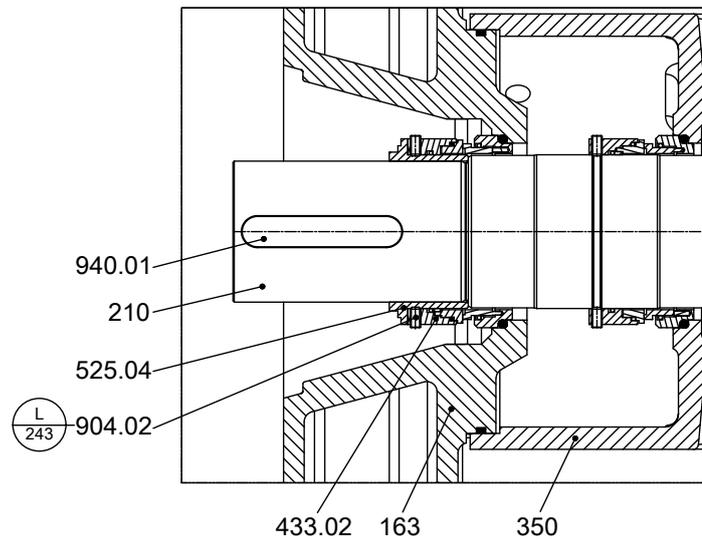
Drawing of the impeller-end mechanical seal for motors 260 8.N, 300 8.N, 350 8.N
